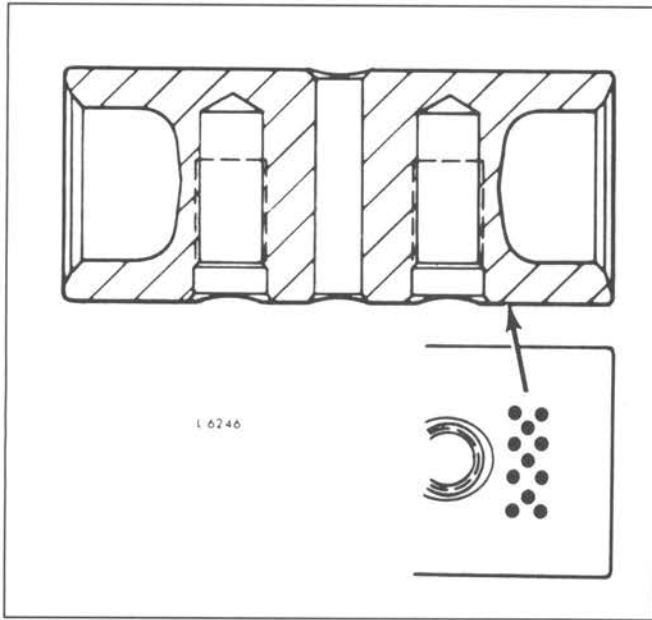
Identification of Piston Pins - Turbocharged Engines
